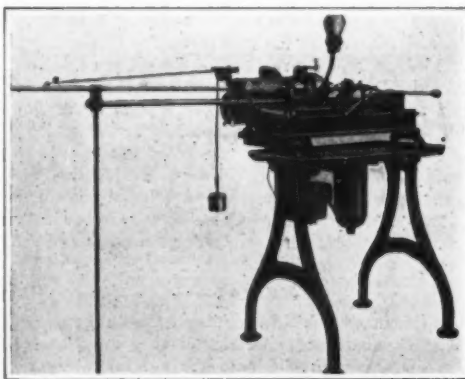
Protecting tube covering the rod of rotating material on a turret lathe.
